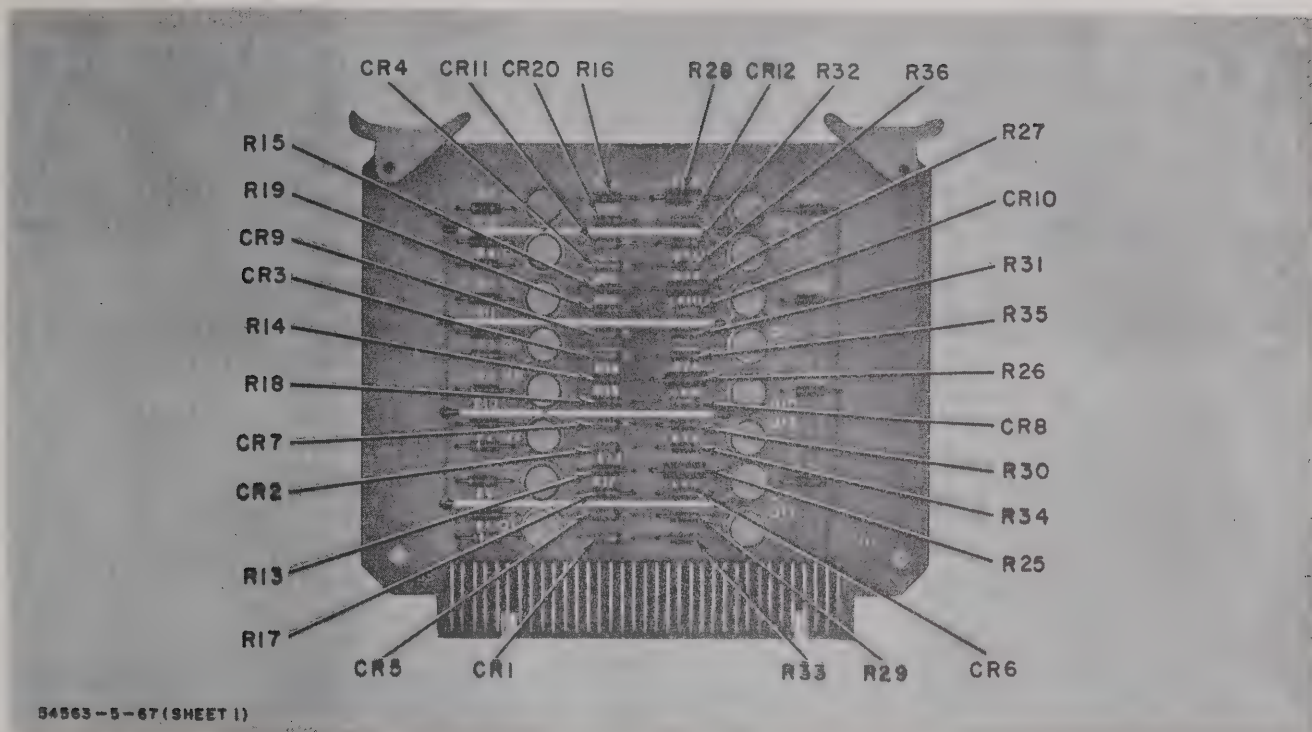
Light Drivers Printed Wiring Board A2, ECI 61-00943-001, Part Location (Sheet 1 of 2)
